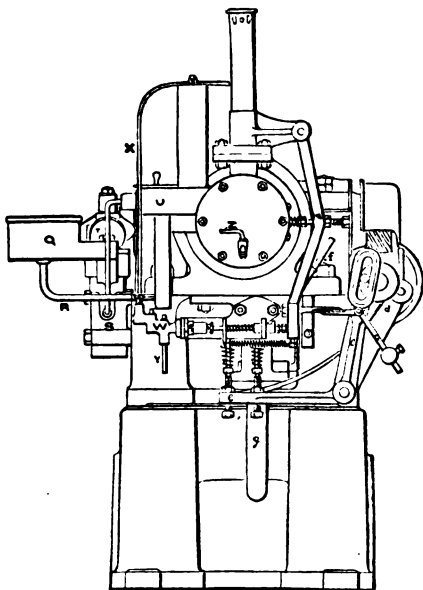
Arrangement of Valves, Levers, &c., in Weyman and Hitchcock's Trusty Oil Engine.
